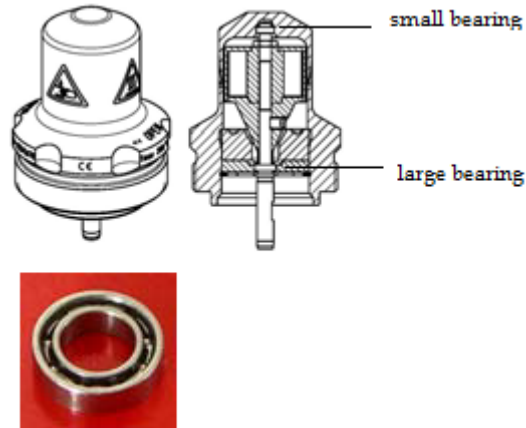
Pressure head and ball bearing located inside of the head [34].
